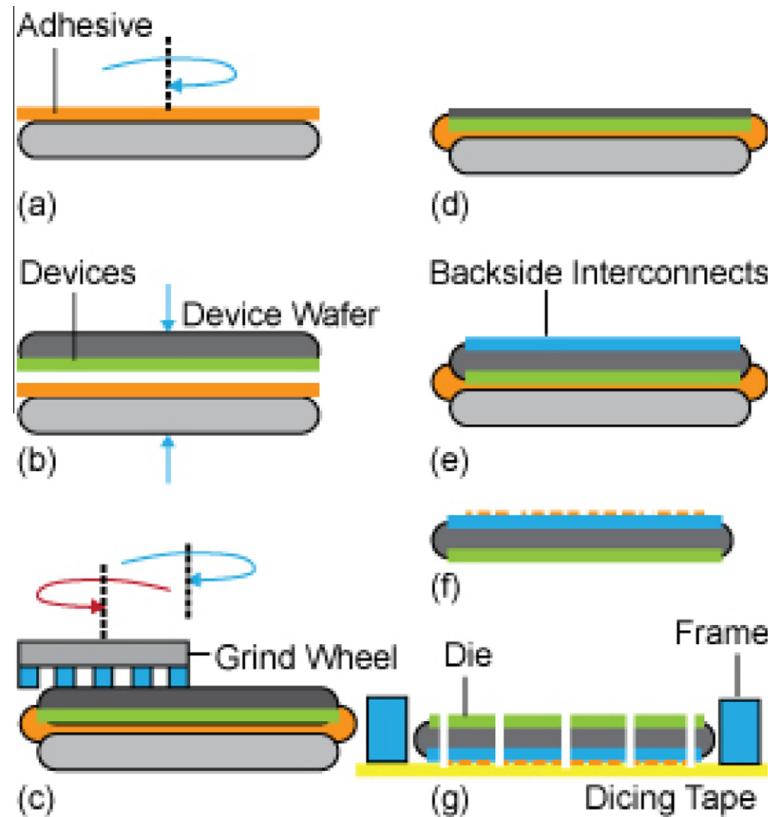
Process flow for wafer thinning; (a) apply adhesive to support wafer; (b) bond device wafer to support wafer; (c) thin device wafer by grinding; (d) polish or etch Si to remove grind damage; (e) form backside interconnects or bond pads; (f) debond handle wafer and clean; (g) mount wafer on film frame for dicing [79].
